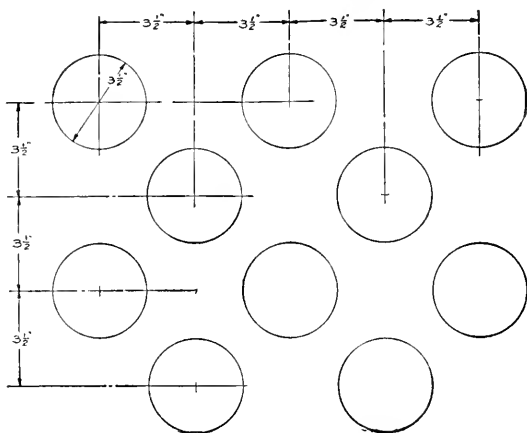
TUBE SPACING IN TYPE A BOILER.
